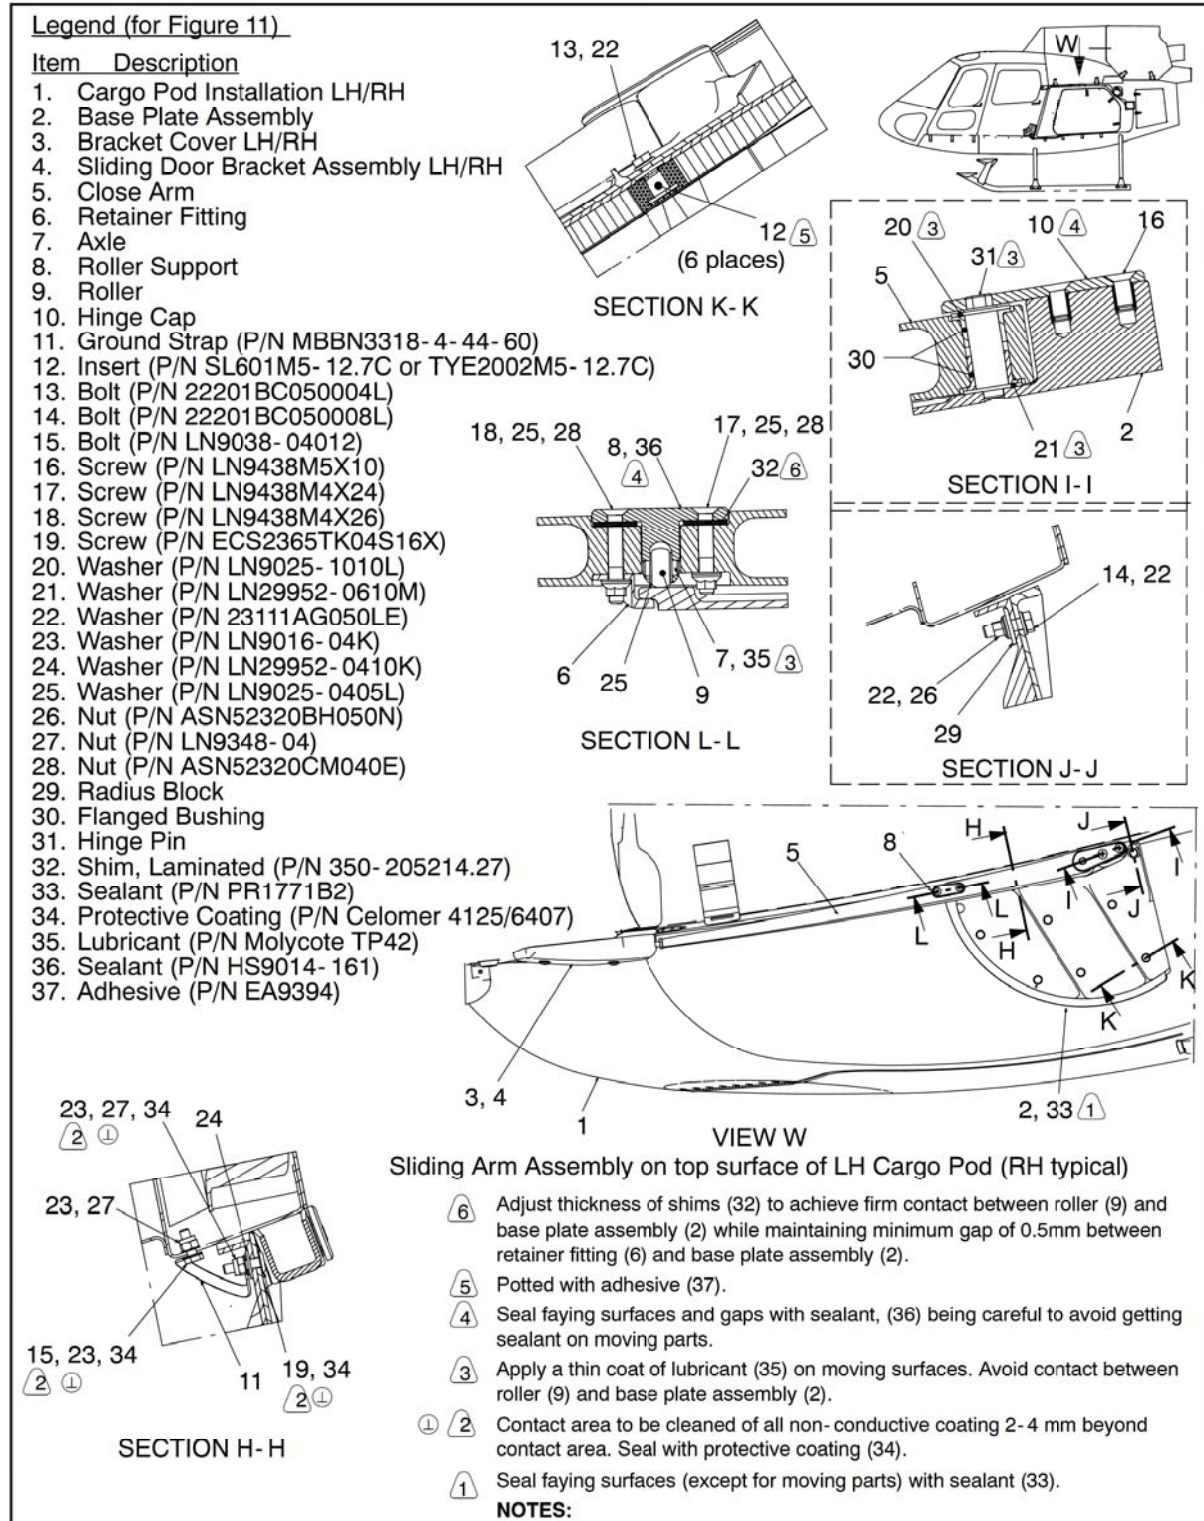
Sliding Door Installation - Sliding Door Upper Arm Assembly
